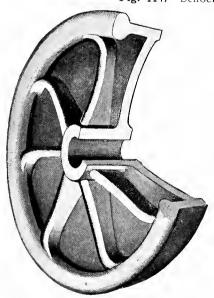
Single Plate Chilled Cast Iron Wheel.
